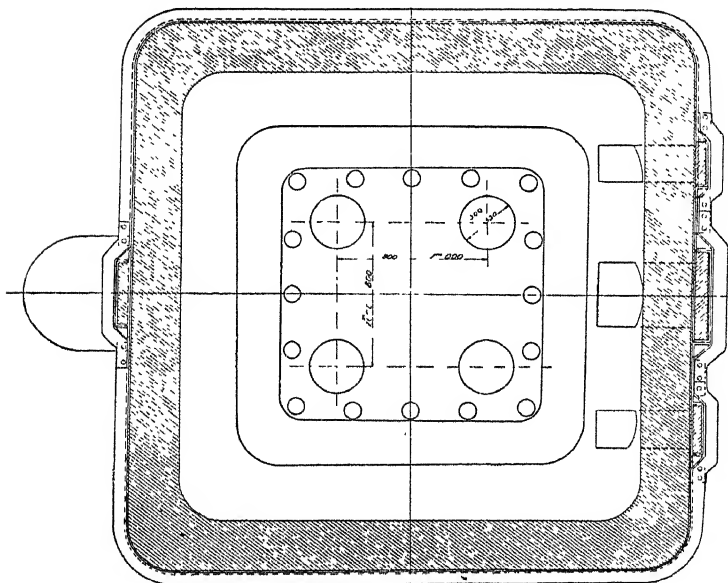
PLAN OF 12-TON GIROD ELECTRIC FURNACE.
